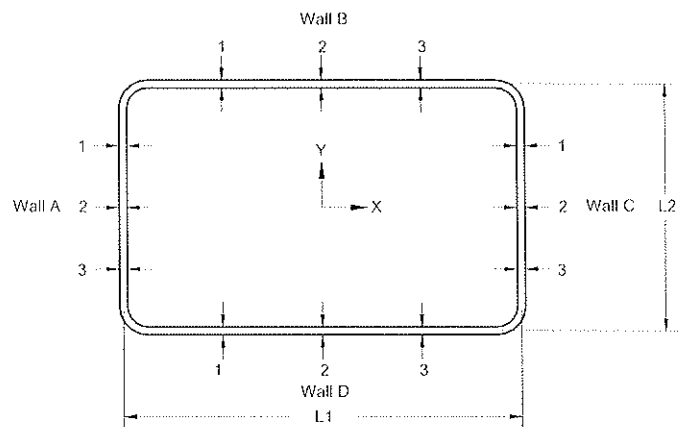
Details of dimensions taken for measurement on a laser consolidated rectangular cutting pattern.
